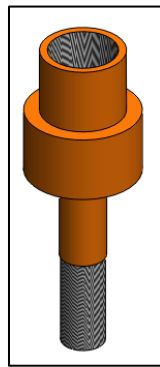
CIRCULAR DRILL BIT EXTENSION.
